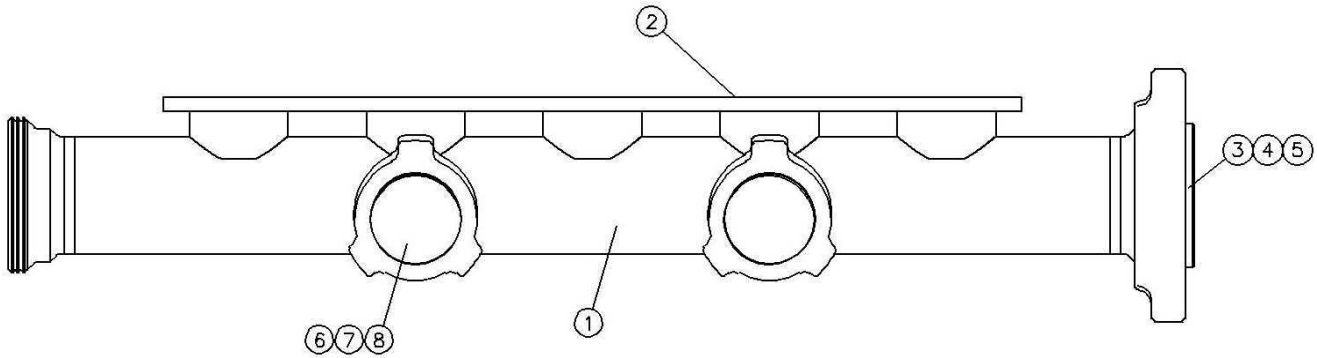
6" CO2 SUCTION MANIFOLD ASSEMBLY WITH 2 CLEANOUTS
